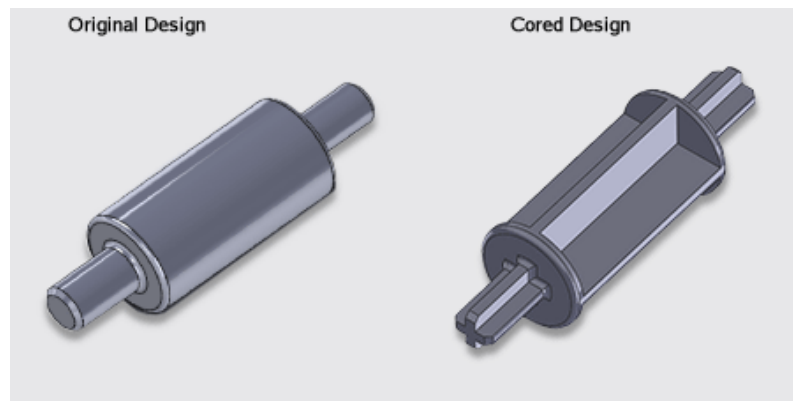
Example of a component designed for lathe production and its cored counterpart suitable for injection molding (ProtoLabs).
